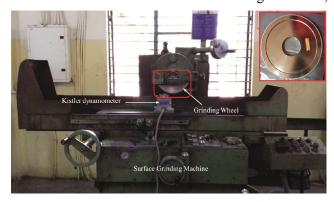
2% CNT incorporated CBN grinding wheel on the surface grinding machine.
